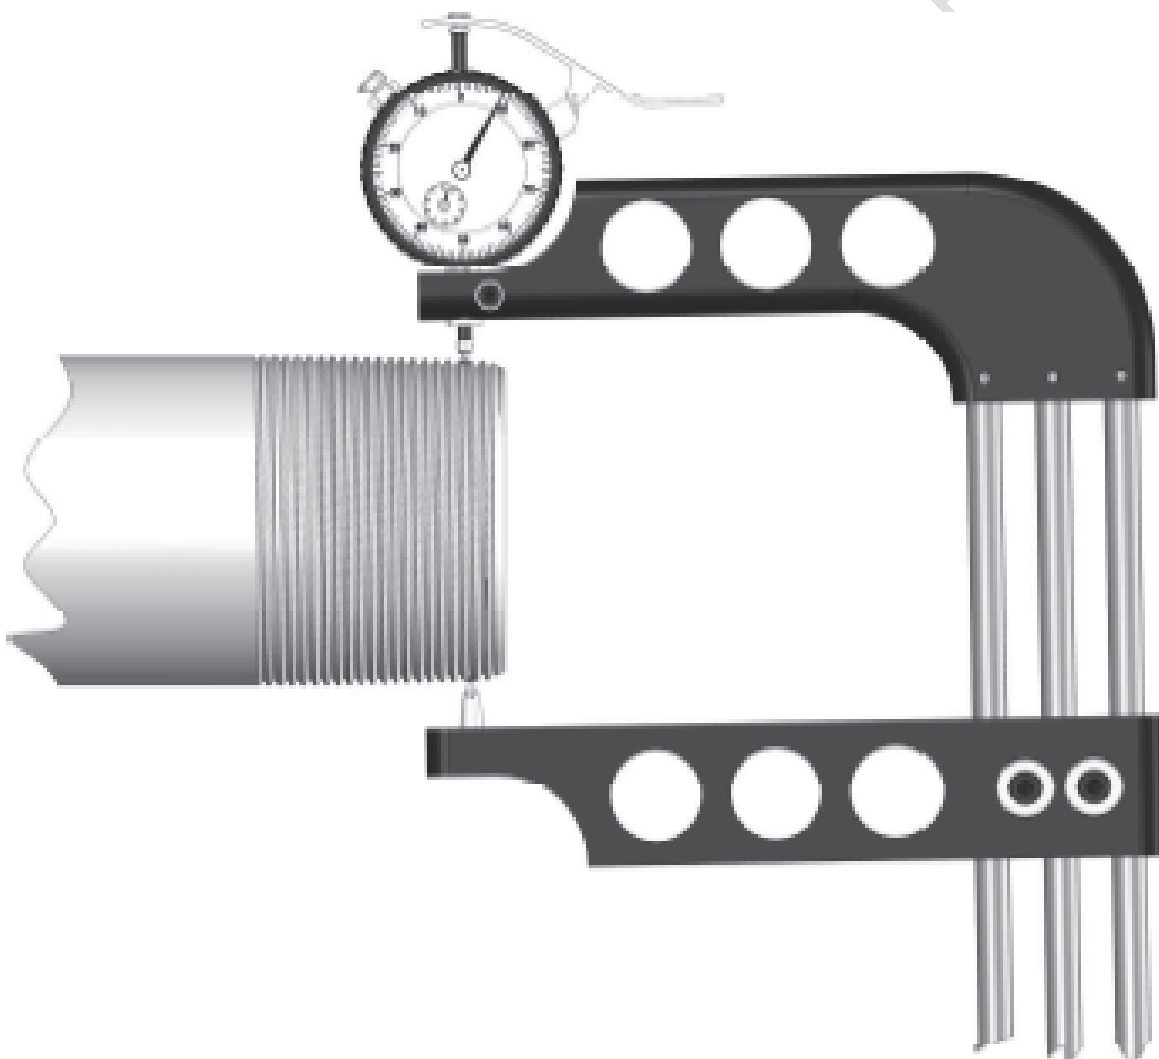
External Thread Taper Measurements (Gauge Set near First Perfect Thread)
